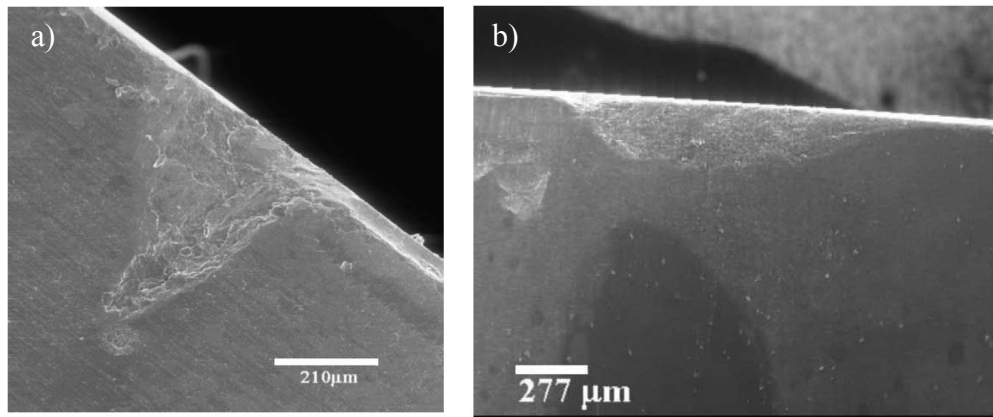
Typical wear pattern of mixed alumina ceramic tool (a) notch wear and (b) flank wear [86]
